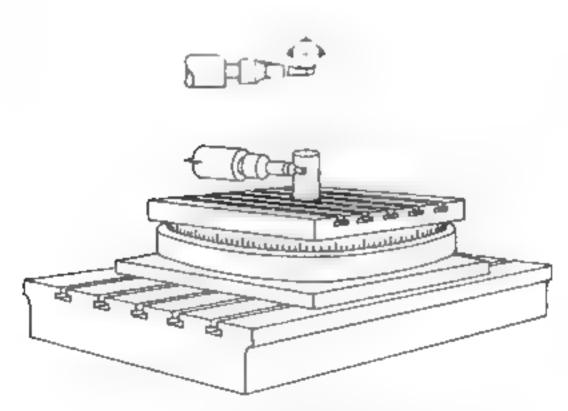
Method of a igning axes of mactane spindle and rotary table by use of edge finder
